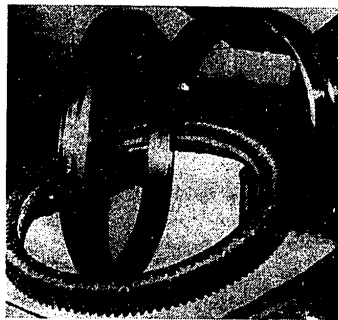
Typical parts of the large bearings, machined on the VGM machines.
